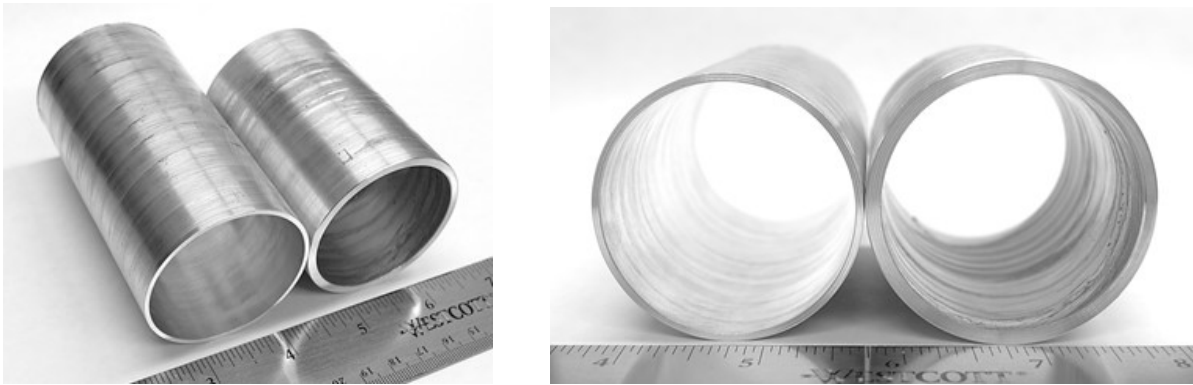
A.2.3. ZK60 tubing fabricated using the new ShAPE™ machine. Source: PNNL.
